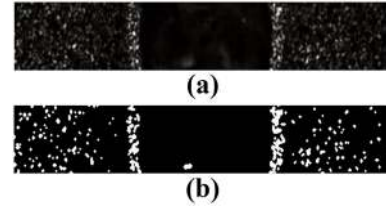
(a)Original weld image; (b)Processed weld image.
